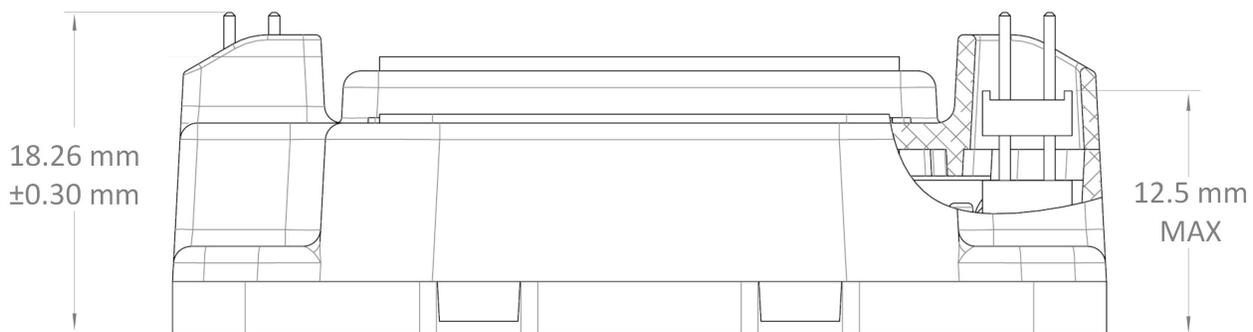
XM cut out view with pin engagement specifications. All units are in mm.
